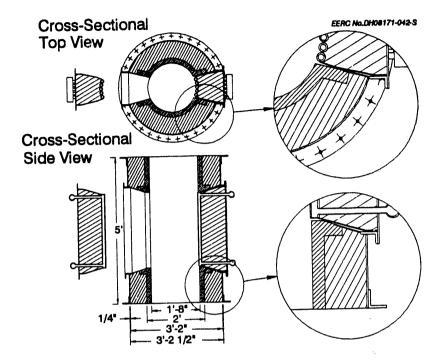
Details of construction for installation of removable water-cooled heat exchangers in refractory-lined combustor sections.
